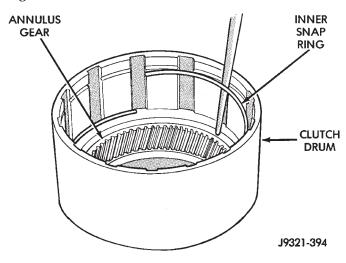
Clutch Drum Inner Retaining Ring Installation
